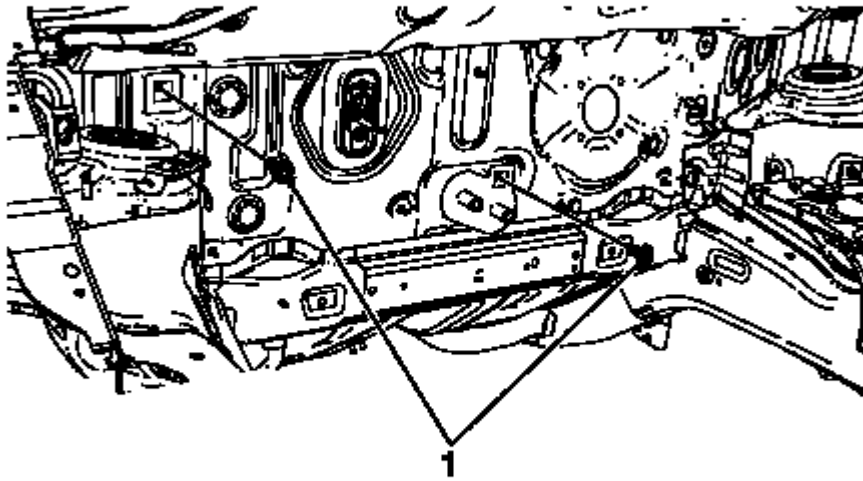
HVAC Module Assembly And Dash Panel Bolts
